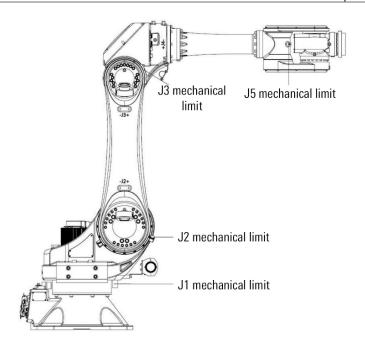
AIR50-2260/AIR80-2260 mechanical brake
